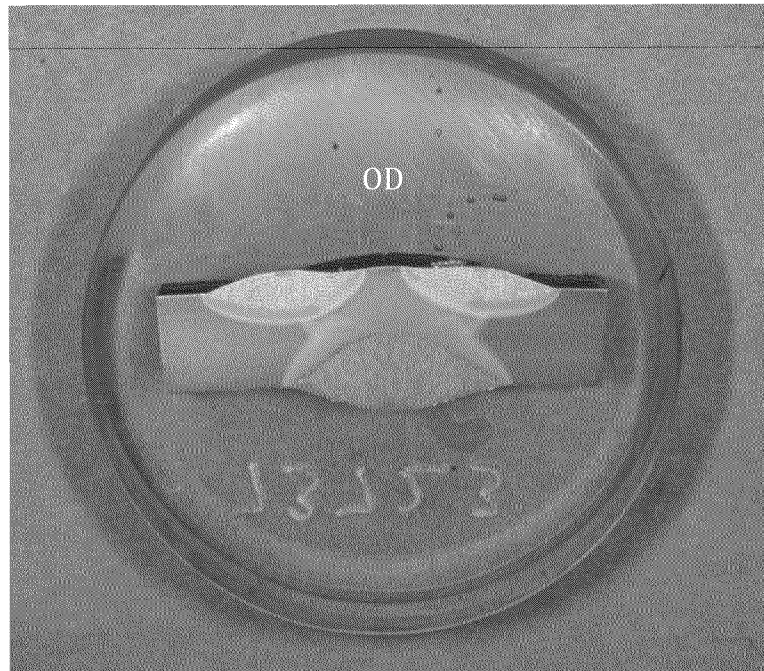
Photograph of OD weld button metallographic mount.
